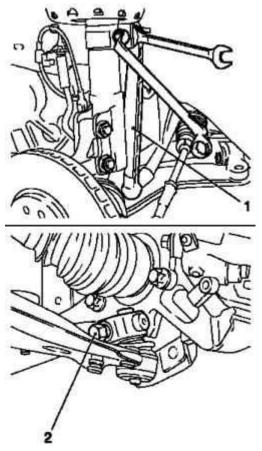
Removing the rotary arm supporting the pipe from the spring rack: 1, 2 - a special tool
